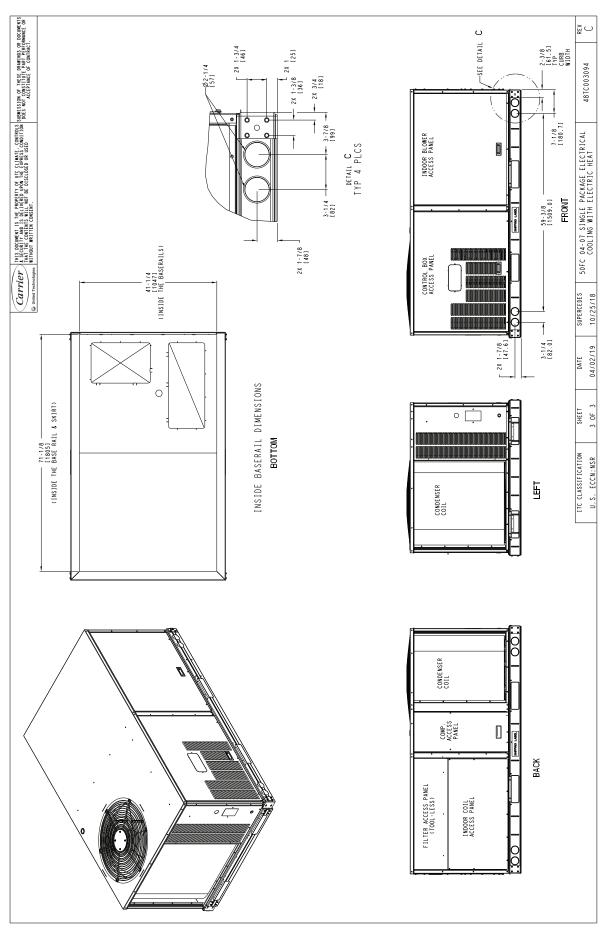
50FC\*\*04-07 Dimensional Drawing (cont)
